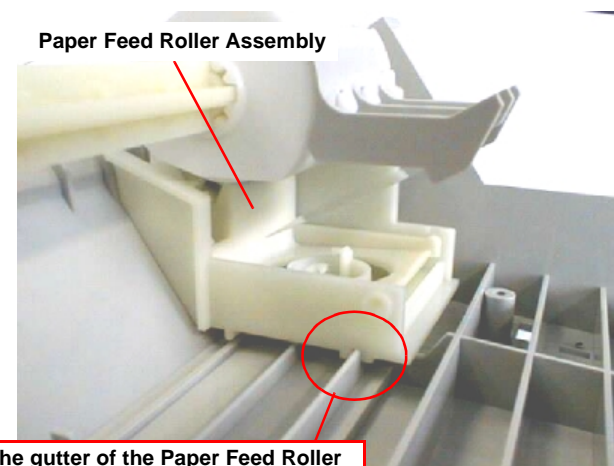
Fitting the Paper Feed Roller Assy. to the Rail
